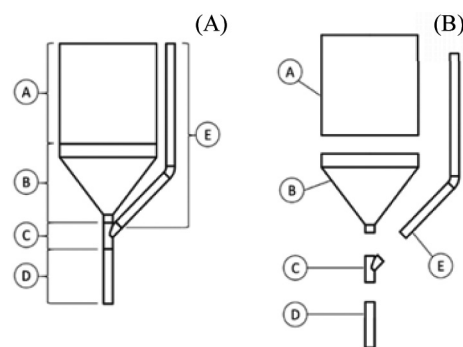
Conceptual and analytical design: (A) machine assembly; (B) machine components, where A = water tank, B = funnel, C = Y-junction, D = sand collector, and E = drain outflow tube
